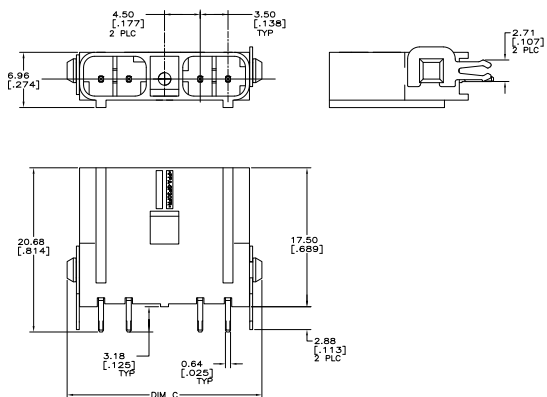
is a technical drawing showing the dimensions of the housing in millimeters. The drawing includes a top view and a side view. Key dimensions and features are labeled as follows:
